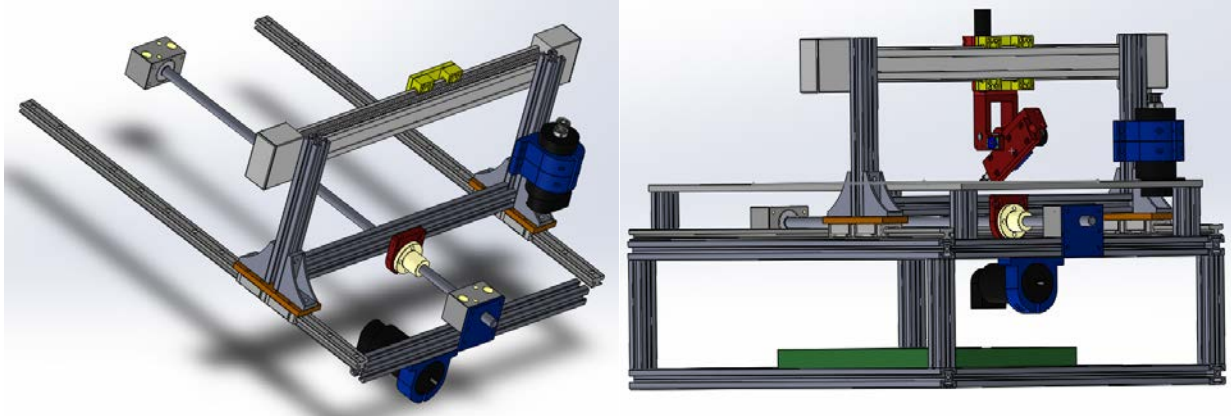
[LEFT] The figure shows the CAD model of just the elements that belong to the 2-axis gantry system. The lower axis is a screw-drive connected to linear bearings that slide on rails. Attached to each of the bearings is a post that supports the belt drive. [RIGHT] The full assembly. Note how the screw drive is sunken beneath the writing surface for greater stability and rigidity.
